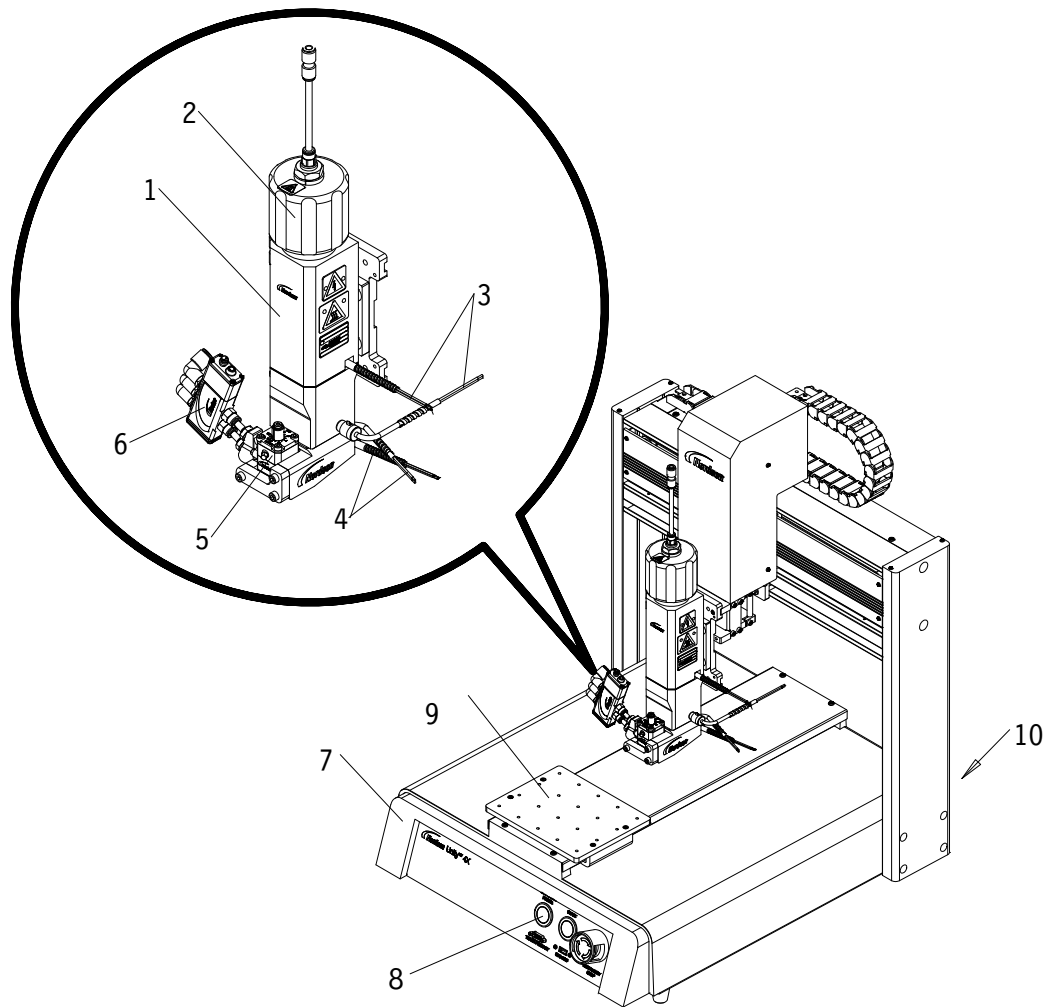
Key components of the applicator and robot assemblies – PURJet 300XT
